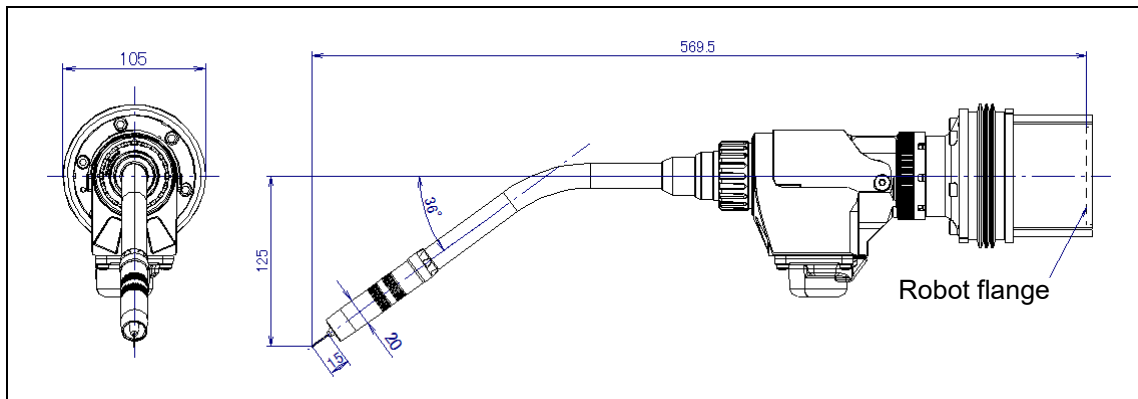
(a) MTB350i G R/36° external dimensions
